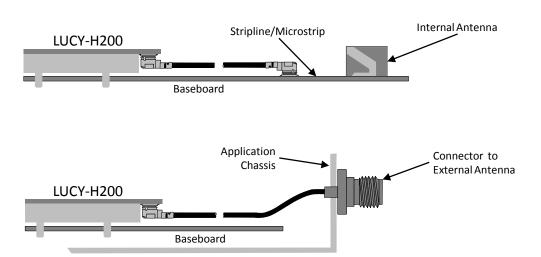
Example of RF connections, U.FL-to-U.FL cable for internal antenna and U.FL-to-SMA for external antenna
